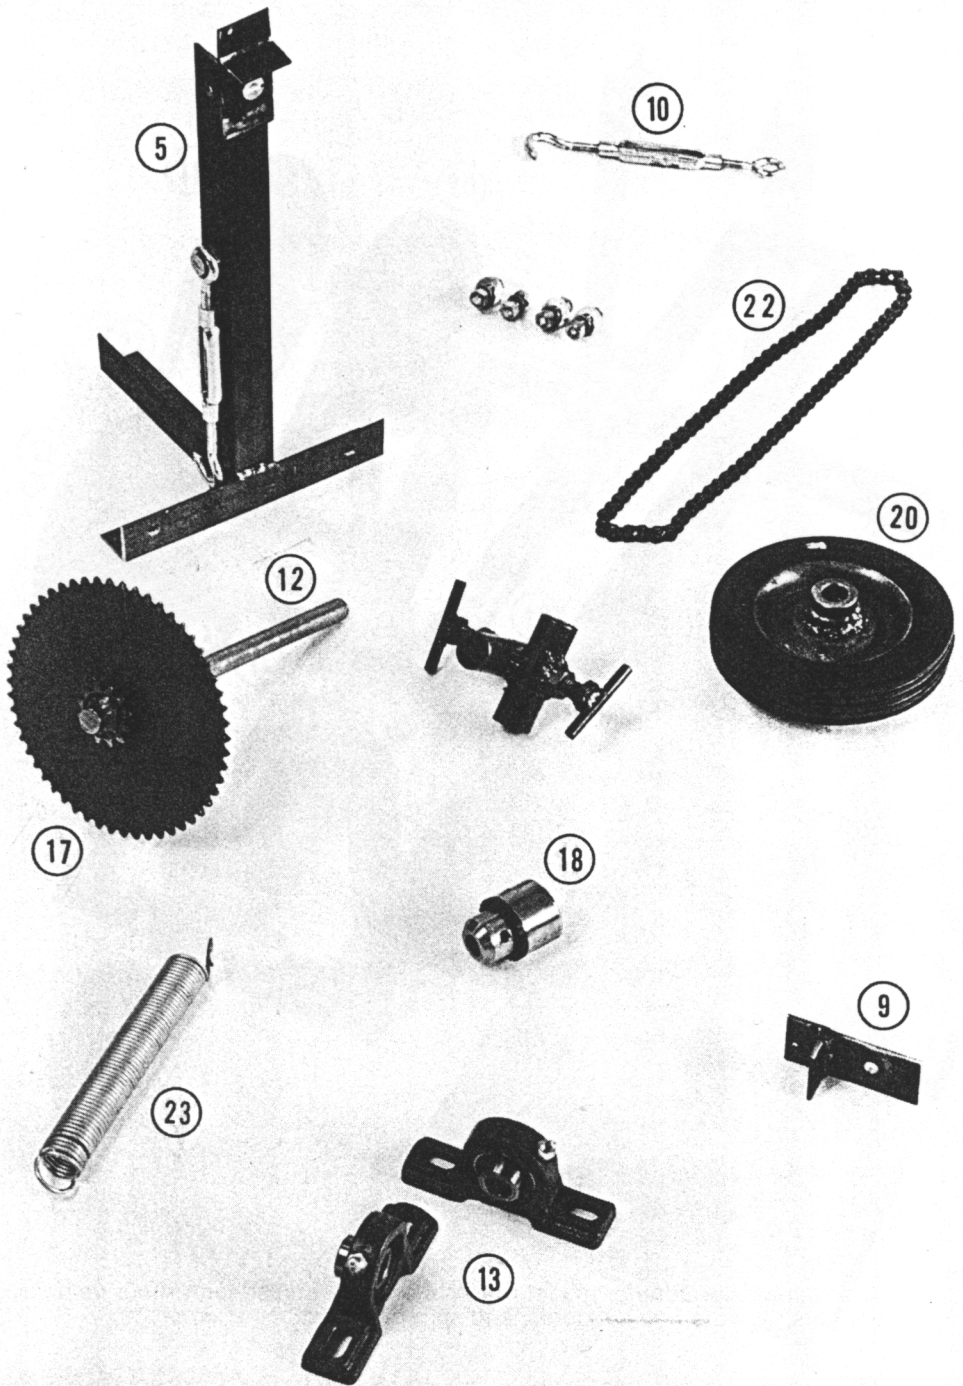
A few simple fabricated parts and some basic hardware make up the rear-wheel power adapter.
